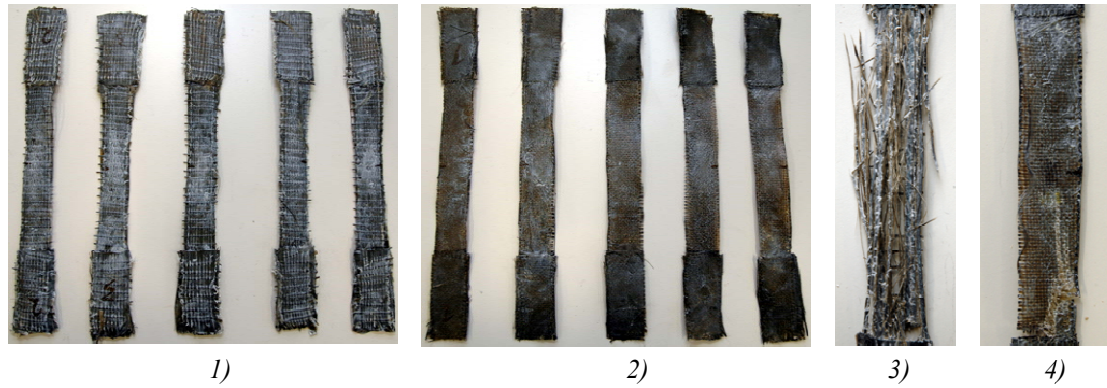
Tensile coupon test specimens. 1) Specimen BU, 2) specimen BB, 3) typical failure of specimen BU, 4) typical failure of specimen BB.
